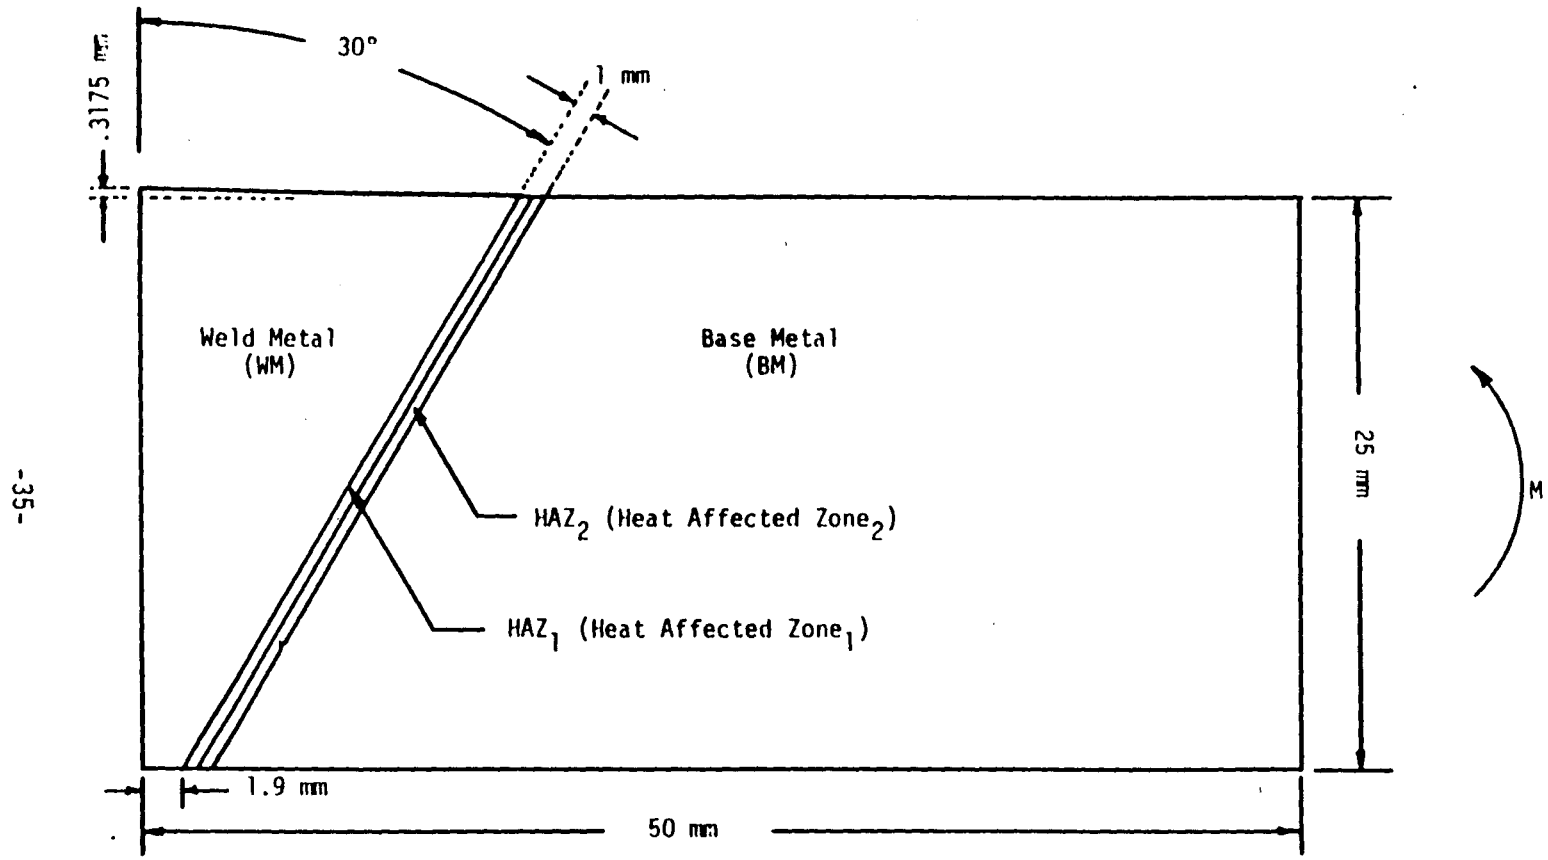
DIMENSIONS OF THE PERFECT WELD JOINT
